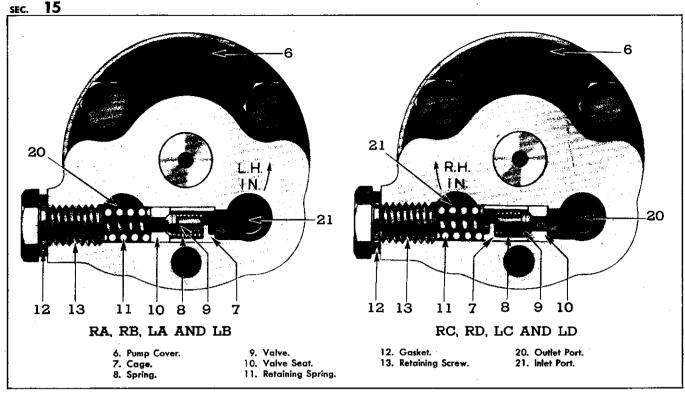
Position of Relief Valve in Pump Cover for Engine Models Indicated.
